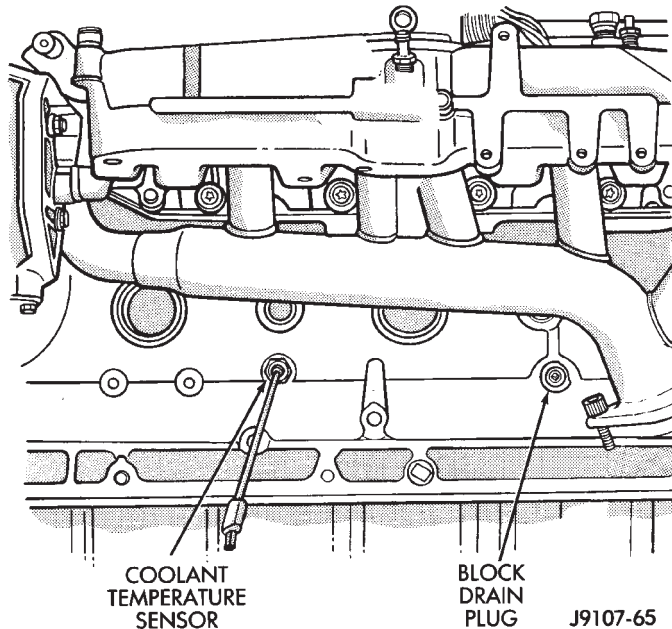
Drain Plug—4.0L 6 Cylinder Engine
